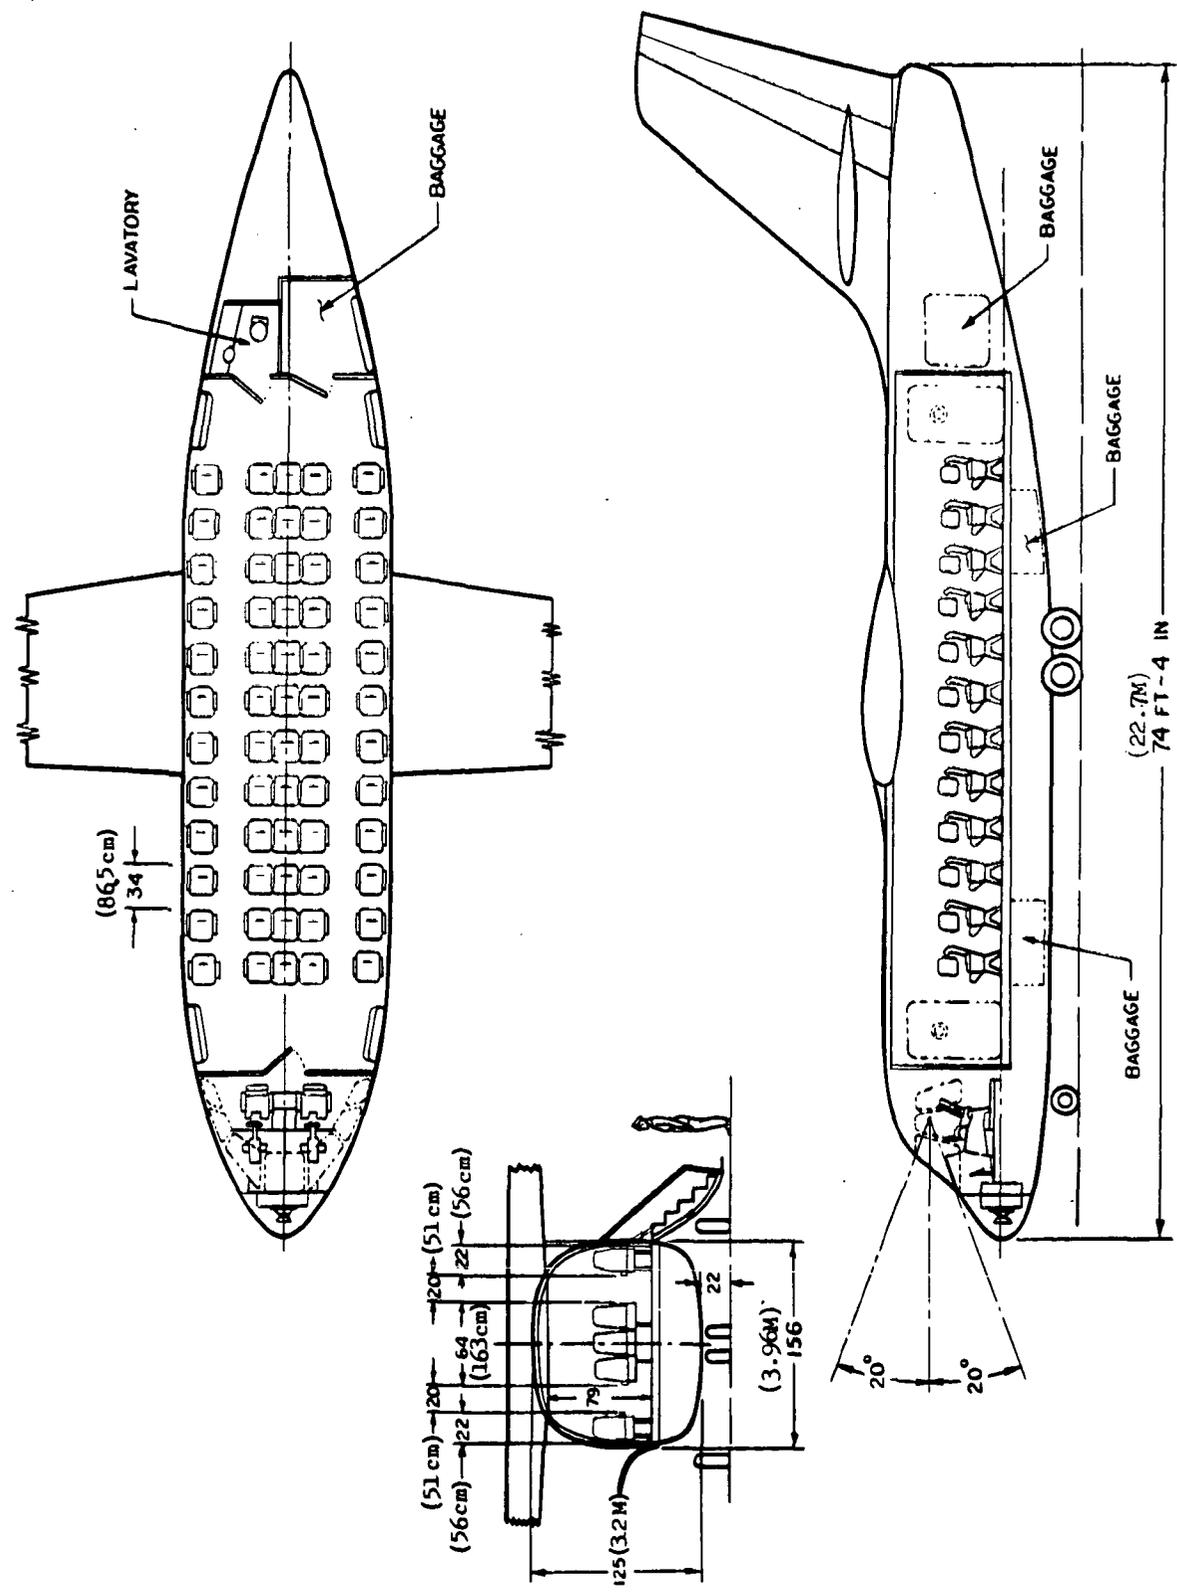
Interior Arrangement - 60 Passenger - All Configurations
